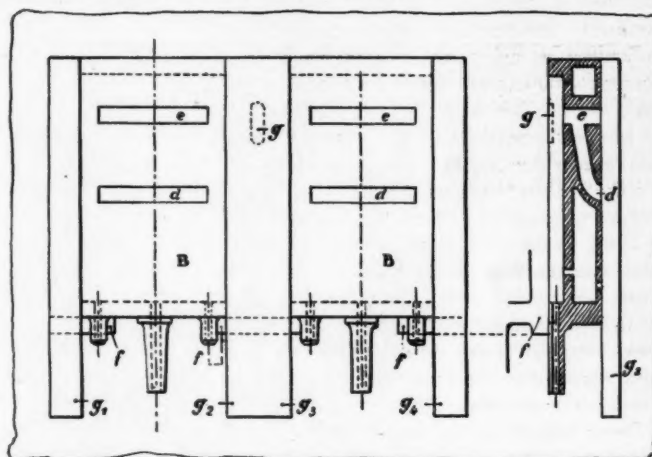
Face view and section of distributor-box B for a pair of cylinders—*g*₁, *g*₂ are spurs for additional guiding of valve plates
